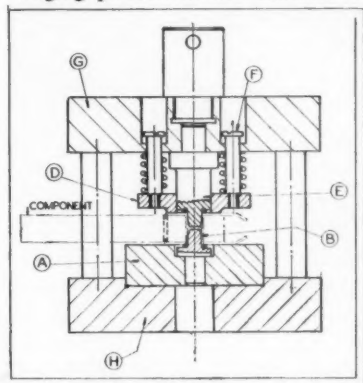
The final swaging tool turns over the other end of the tubular bearing and clinches all four parts together
